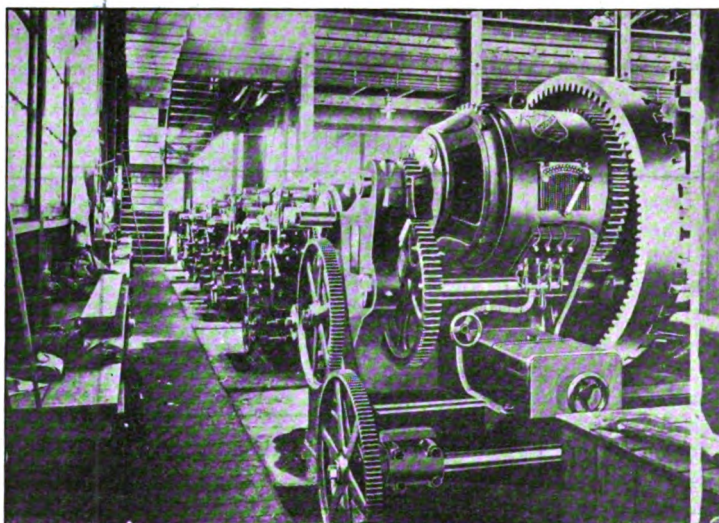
HEAD OF STOCKS OF SOME OF THE MOTOR-DRIVEN LATHES.
